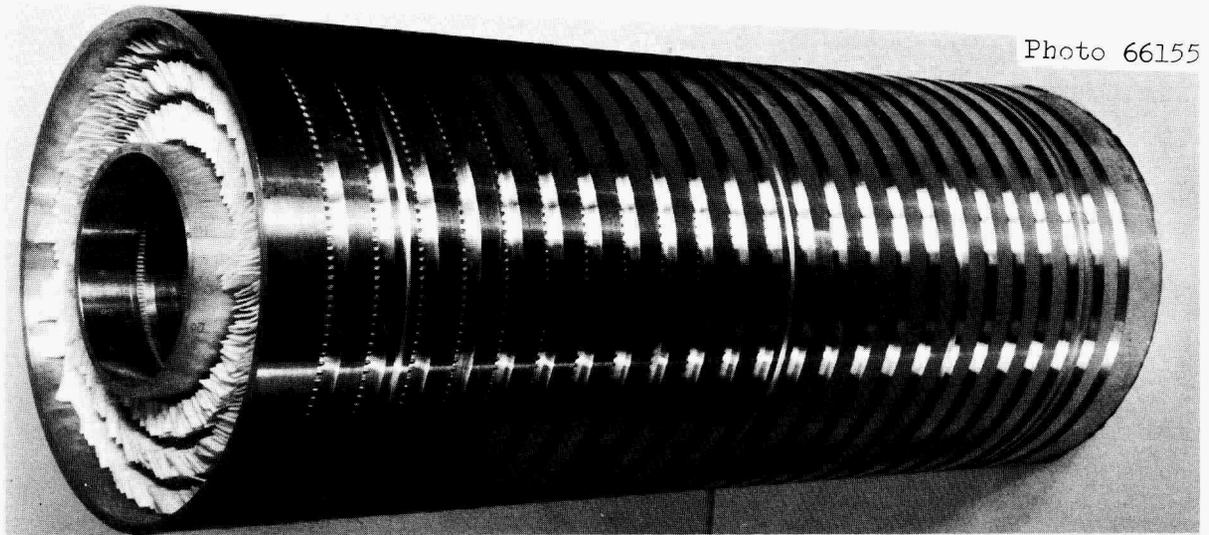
Assembled Element Showing Inserted Teflon Spacers.
